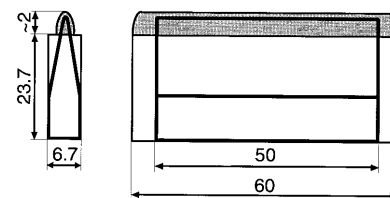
Drawing of the laser-clad sample, epitaxial laser deposited material is in gray, and contours of the TF sample after machining are in bold.
